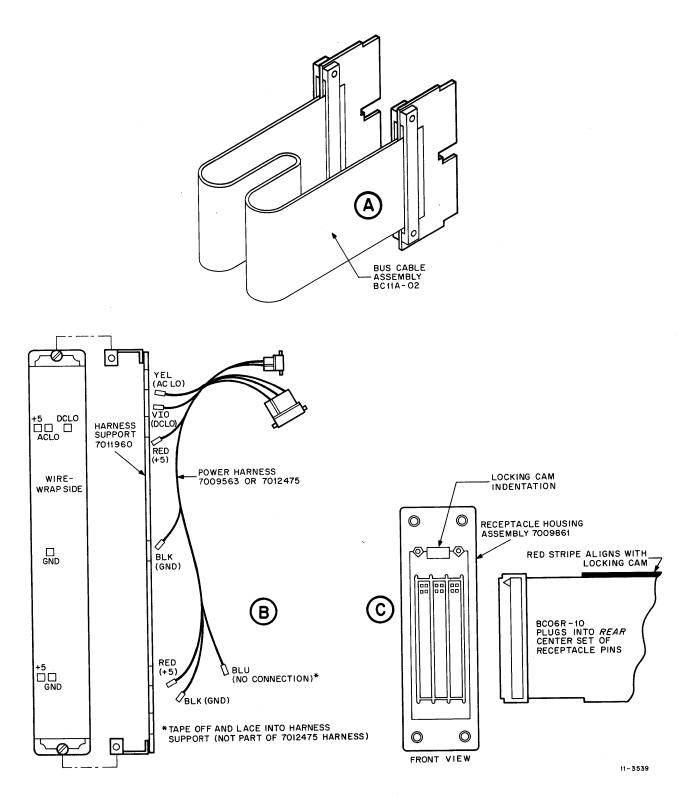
Typical LP20 Controller Assembly Mounting (Sheet 2 of 2)
